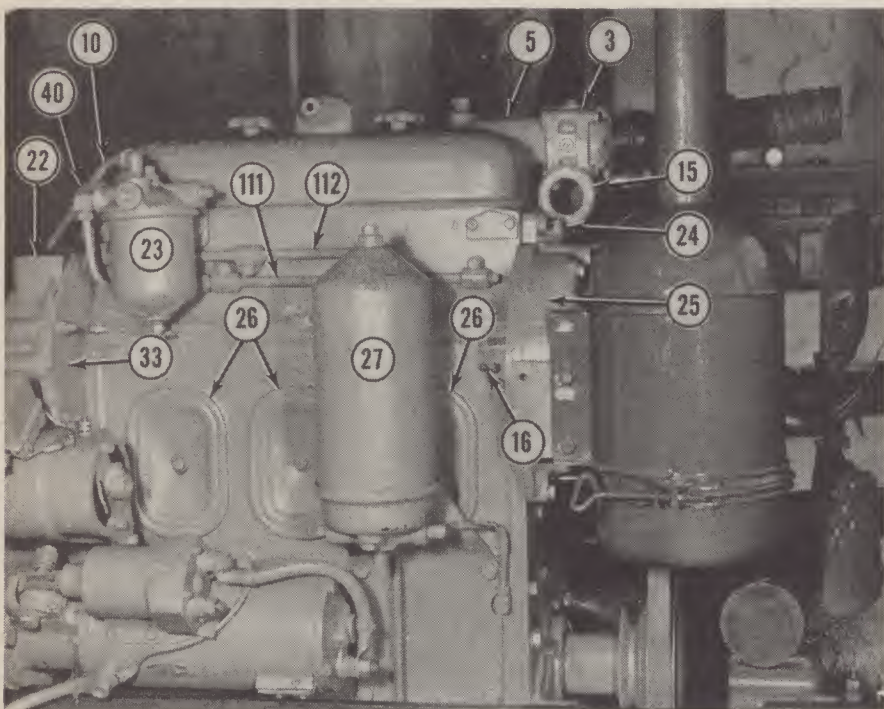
Right side view of a GM engine showing the various components mounted on the cylinder head.
